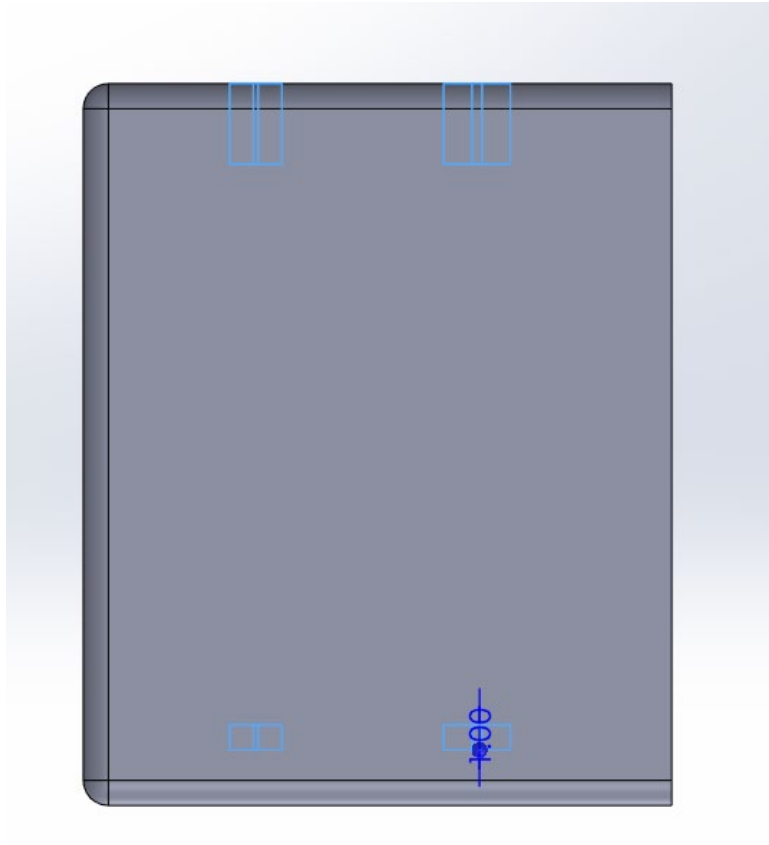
CAD drawing of Prototype 4, the unprinted final prototype, showing the extrusion of slots to hold the mirrors. The slots are 6 mm × 1.5 mm for the inner mirror and 8 mm × 1.5 mm for the outer, extrude through the top and 1 mm to the bottom (measurement highlighted in blue). Unit in mm.
